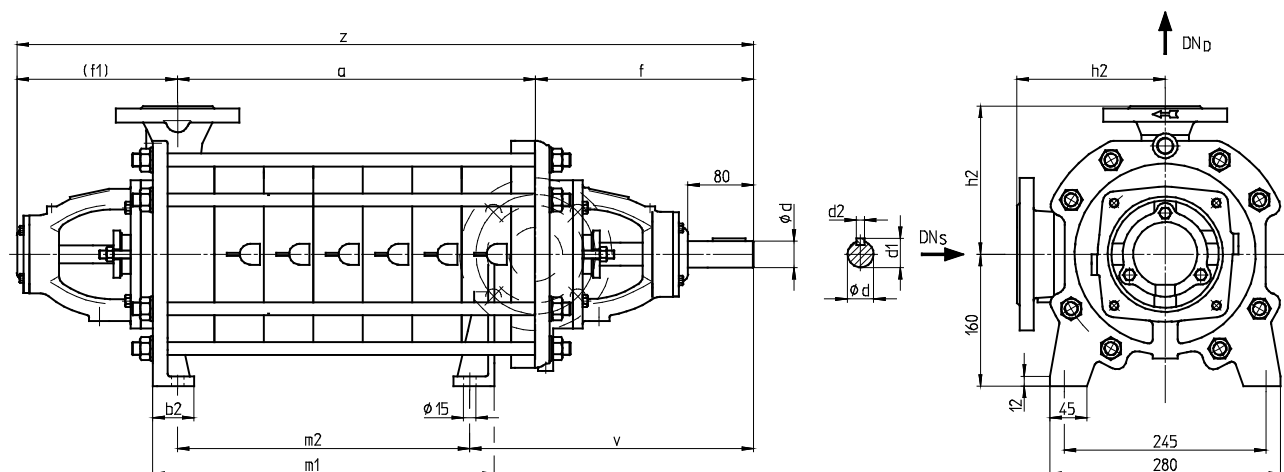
Dimension drawing ES 320, ES 400, ES 500
